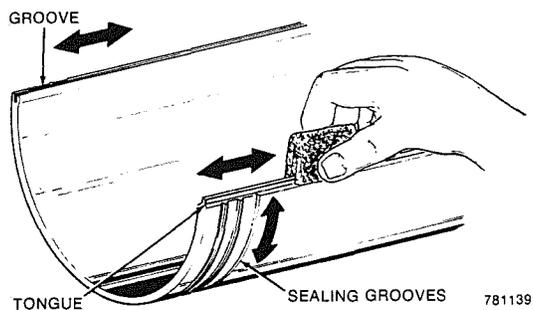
Scuff Tongue, Groove, and Sealing Grooves
